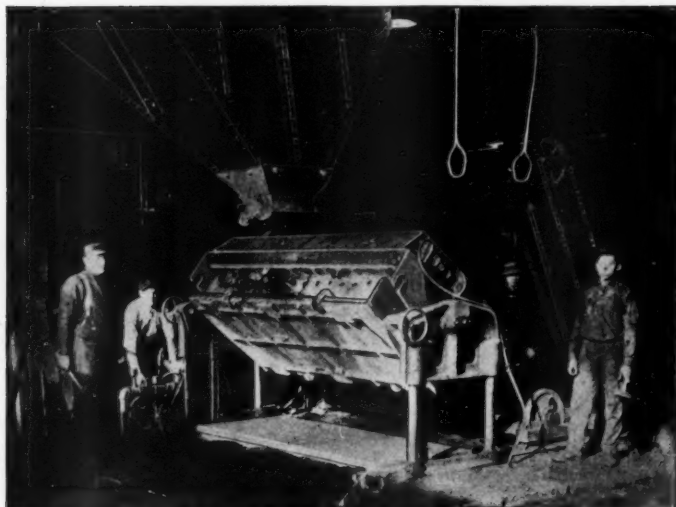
JAR-RAM ROLL-OVER MACHINE USED IN MAKING TUNNEL-SEGMENT MOLDS
